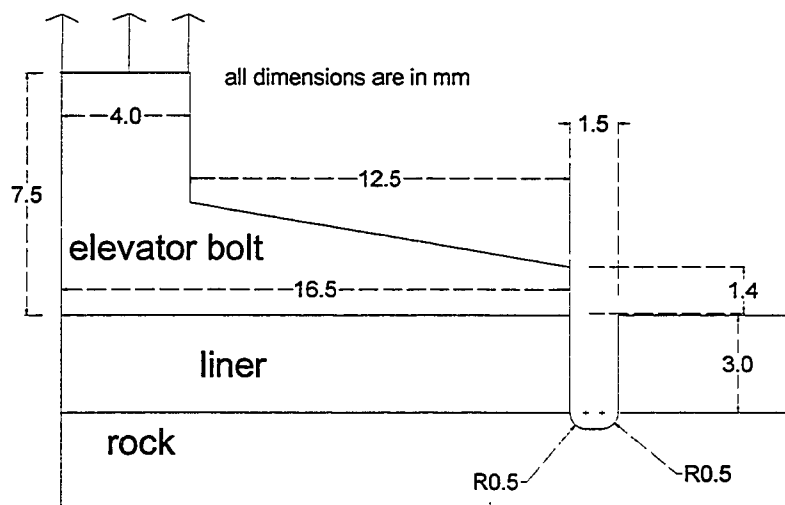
Close-up view of geometry of elevator bolt-liner-rock interfaces.
